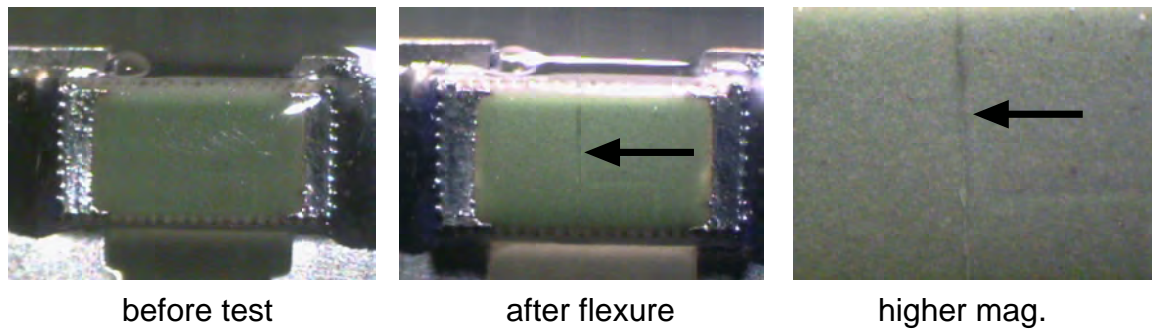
A coated, RM1206 resistor with a fracture but no spalling of the glass passivation exposed to convex flexure.
